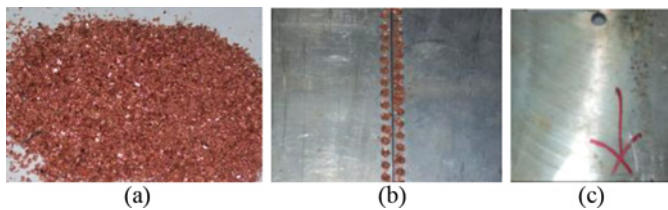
(a) Copper particles. (b) Particles packed in drilled holes. (c) Top side of the weldment (color figure available online).
